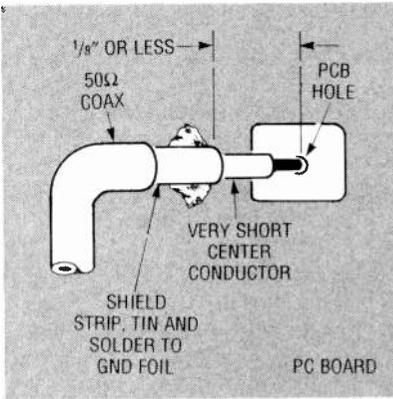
ALL COAXIAL LEADS going to the PC board must be kept as short as possible. Solder them to the board as shown here.
